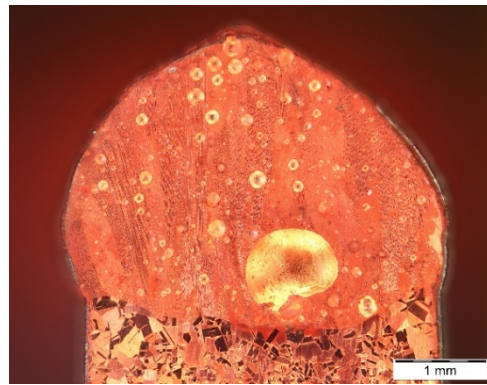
Cross section of a welded pair of hairpins contains pores of different sizes.
